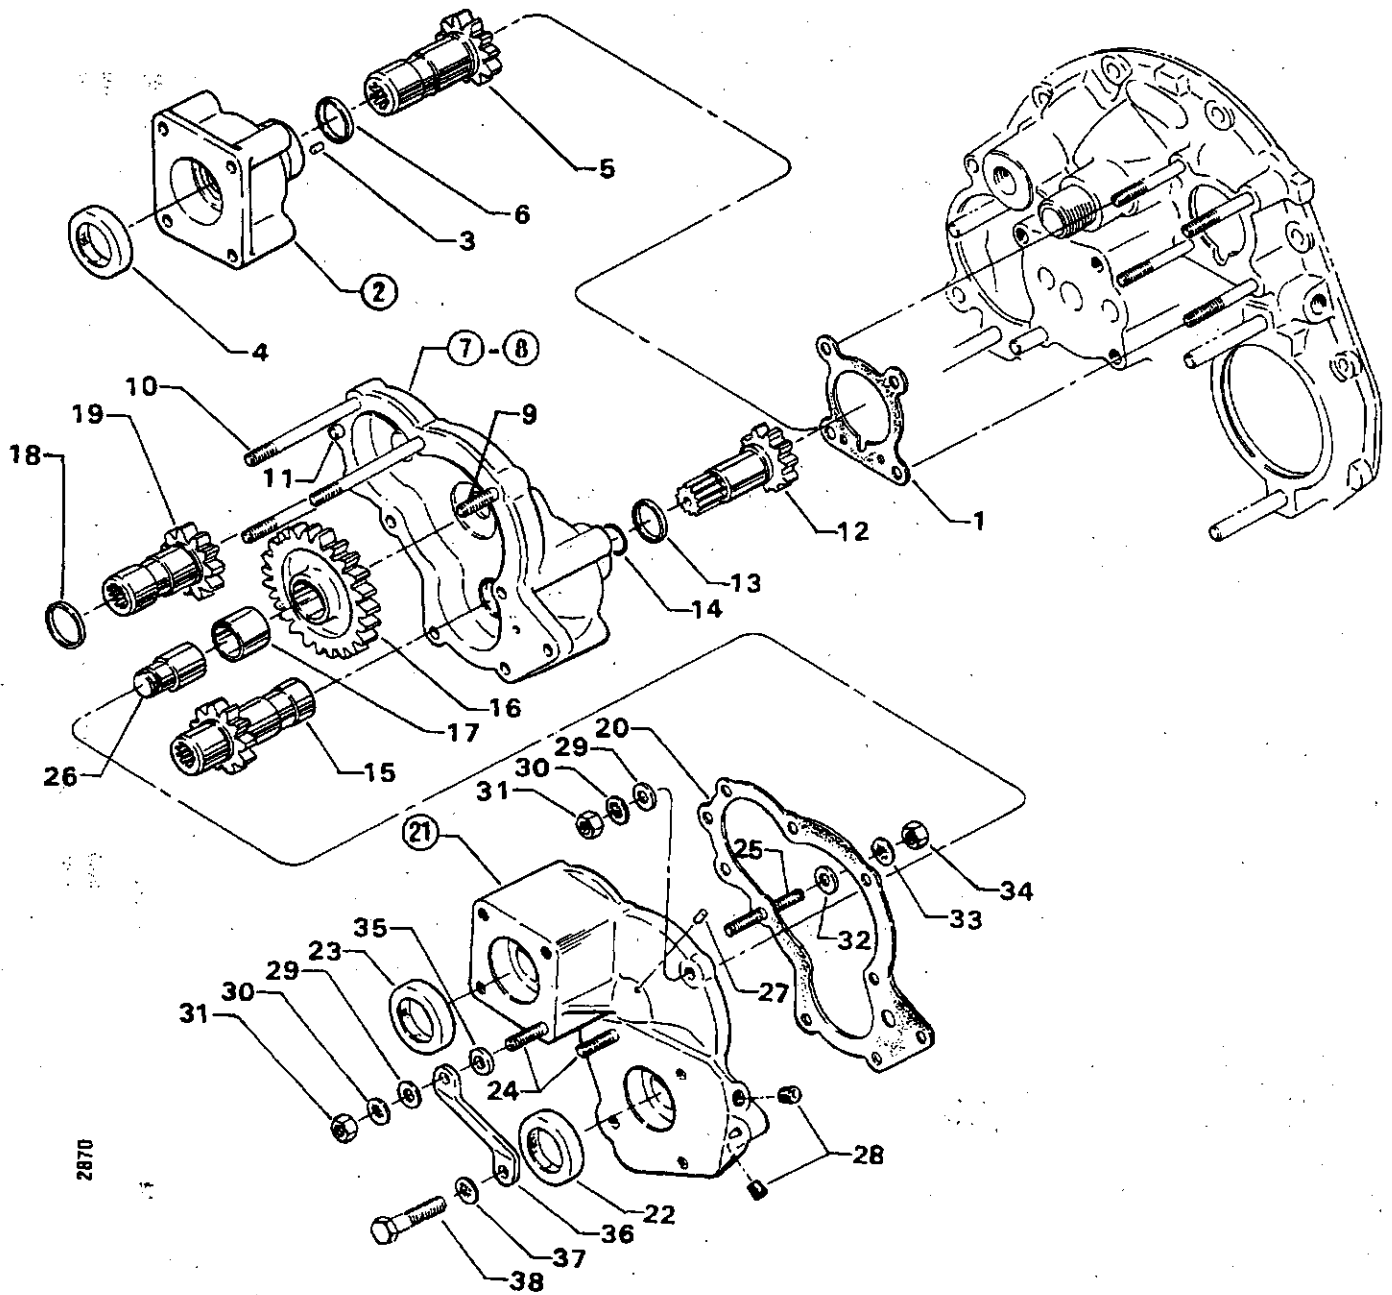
VACUUM PUMP DRIVE AND DUAL DRIVE ASSEMBLIES
